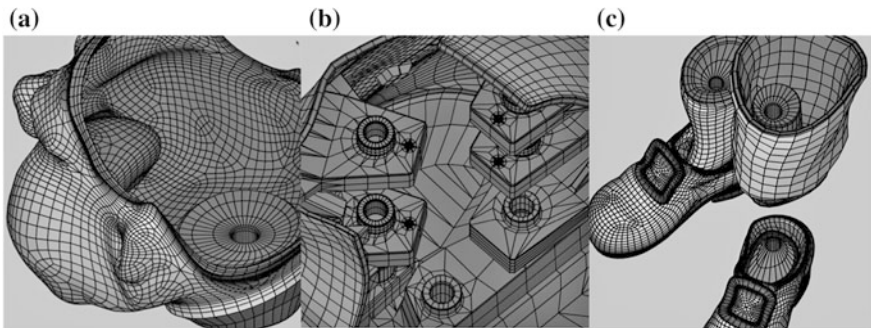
Mesh details of some pieces that make up the figure. a Head showing the hollow interior with CAD records for the guide axis. b Area of the thorax in which the different support plates that were designed with CAD. c Shoes and legs parts, showing the registration for the guide shaft
